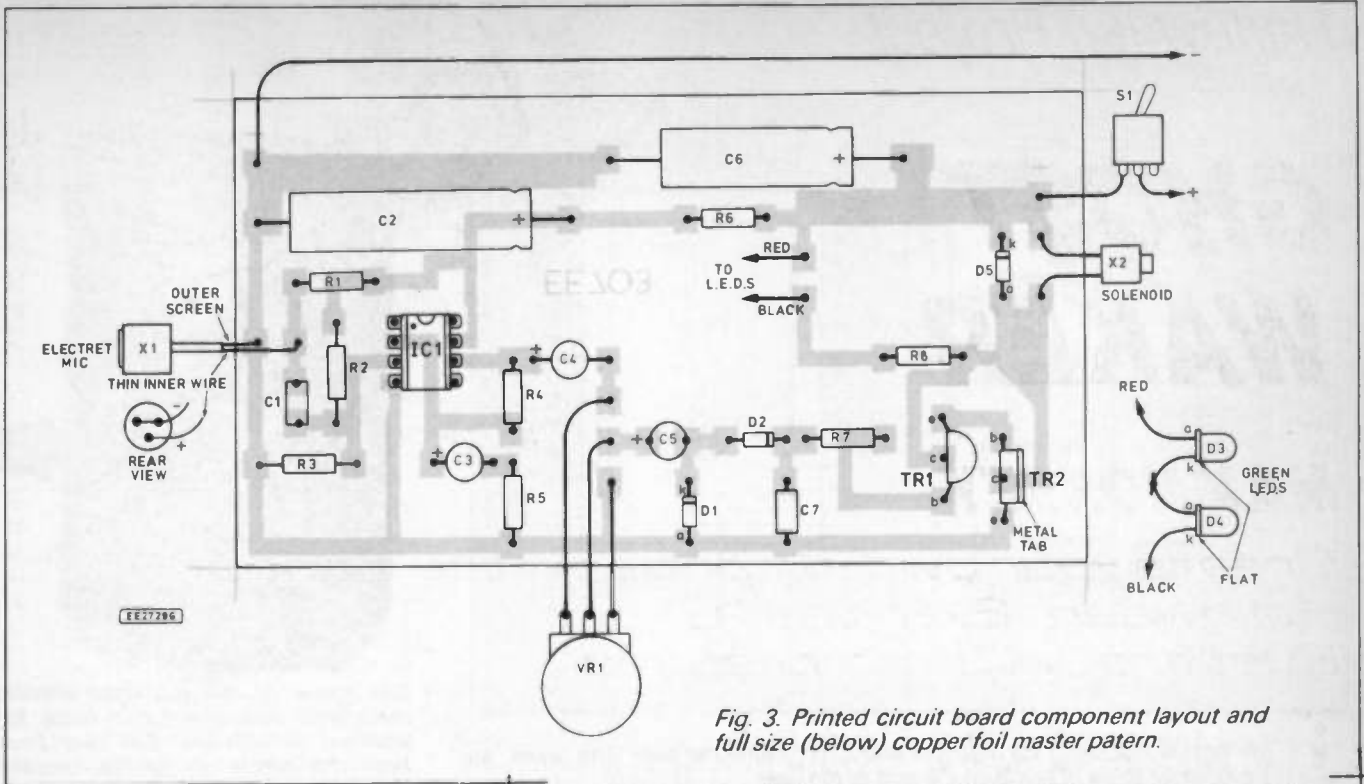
Printed circuit board component layout and full size (below) copper foil master pattern.
